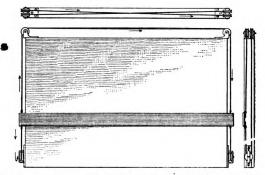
General View of Upright Drawing Table, with Movable Fig. 2.—Drawing Board, with Movable Straight Edge Operated by Means of Cords and Pulleys.
